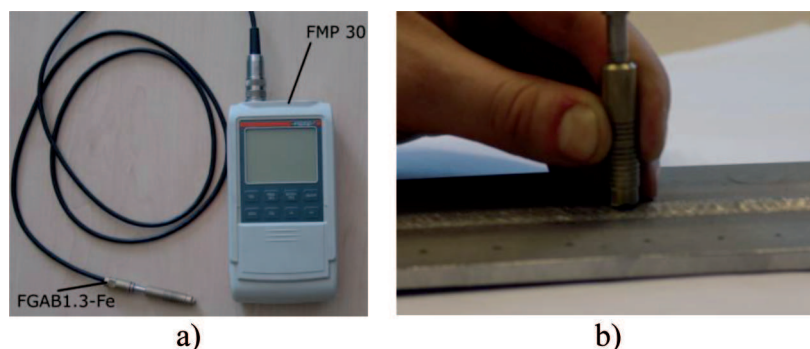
Ferritoscope FMP30 with measurement probe (a) and ferrite content measurement from face of weld on experimental welding joint (b)
